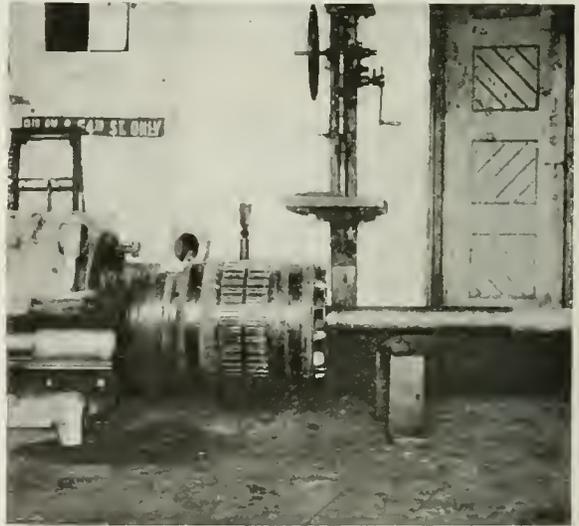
The other end of shaft than that shown in Fig. 9 supported by an oak pole with a steel tube fitting over the shaft
